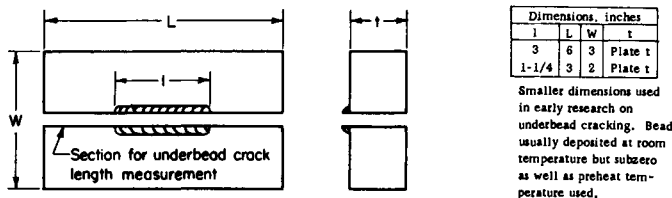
Longitudinal-weld underbead-cracking test specimen.⁽¹⁴¹⁶⁾
